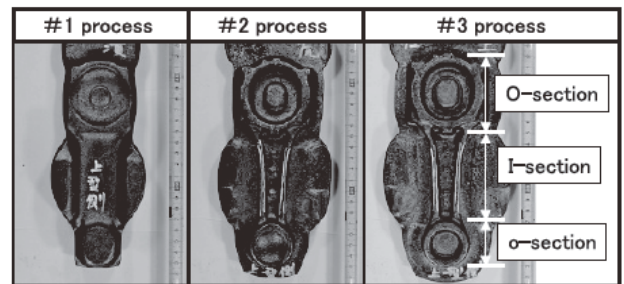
Intermediary and final shapes of hot-forged connecting rod.
